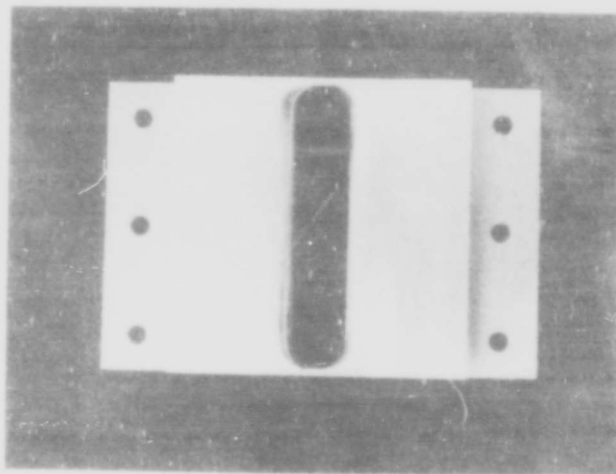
Test Plate With 0.750 In. Slot- 3/8 In. Radius
